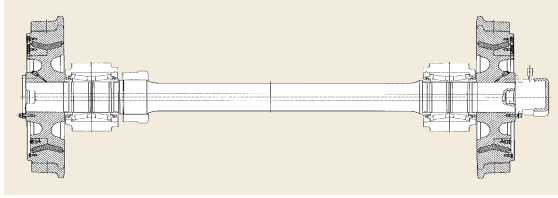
Driven wheelset with inside bearings and rubber elastic wheels for the low-floor tram Schwerin (Germany), wheel type B02000, running circle new 600 mm, gauge 1435 mm, weight 552 kg, without bearings, wheel stiffness 20.0 kN/mm radial and 20 kN/mm axial (Bochumer Verein, BVV, Bochum)
